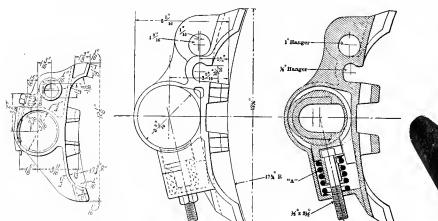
Adjustable Brake Head. Buffalo Brake Beam Company.
